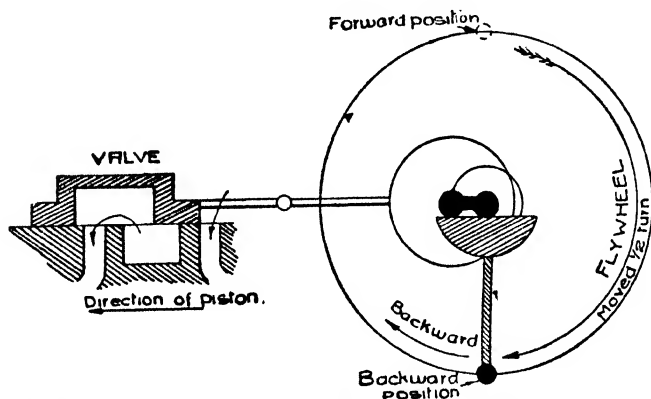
Diagram Explaining the Principle of the Slip-eccentric Reversing Gear.
